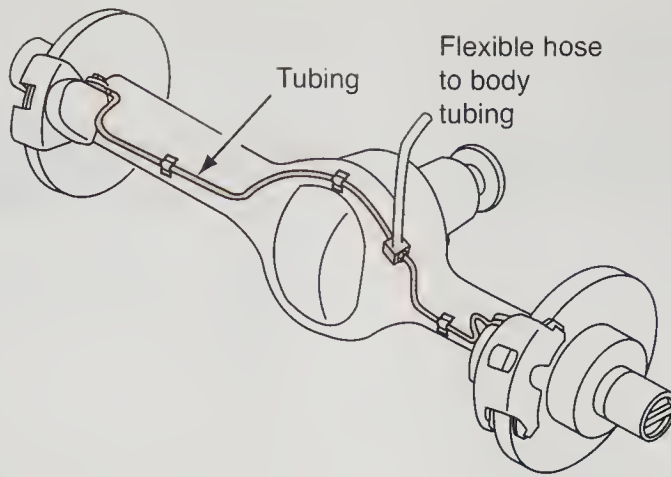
Tubing may also be routed on driveline and suspension parts, such as a solid rear axle housing.
